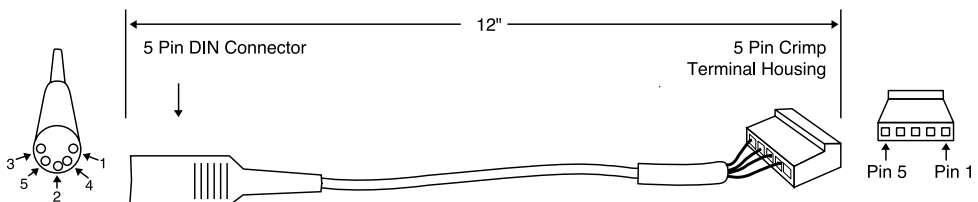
Keyboard Adapter Cable (Symbol P/N 59-16246-01) and Pinout Table
